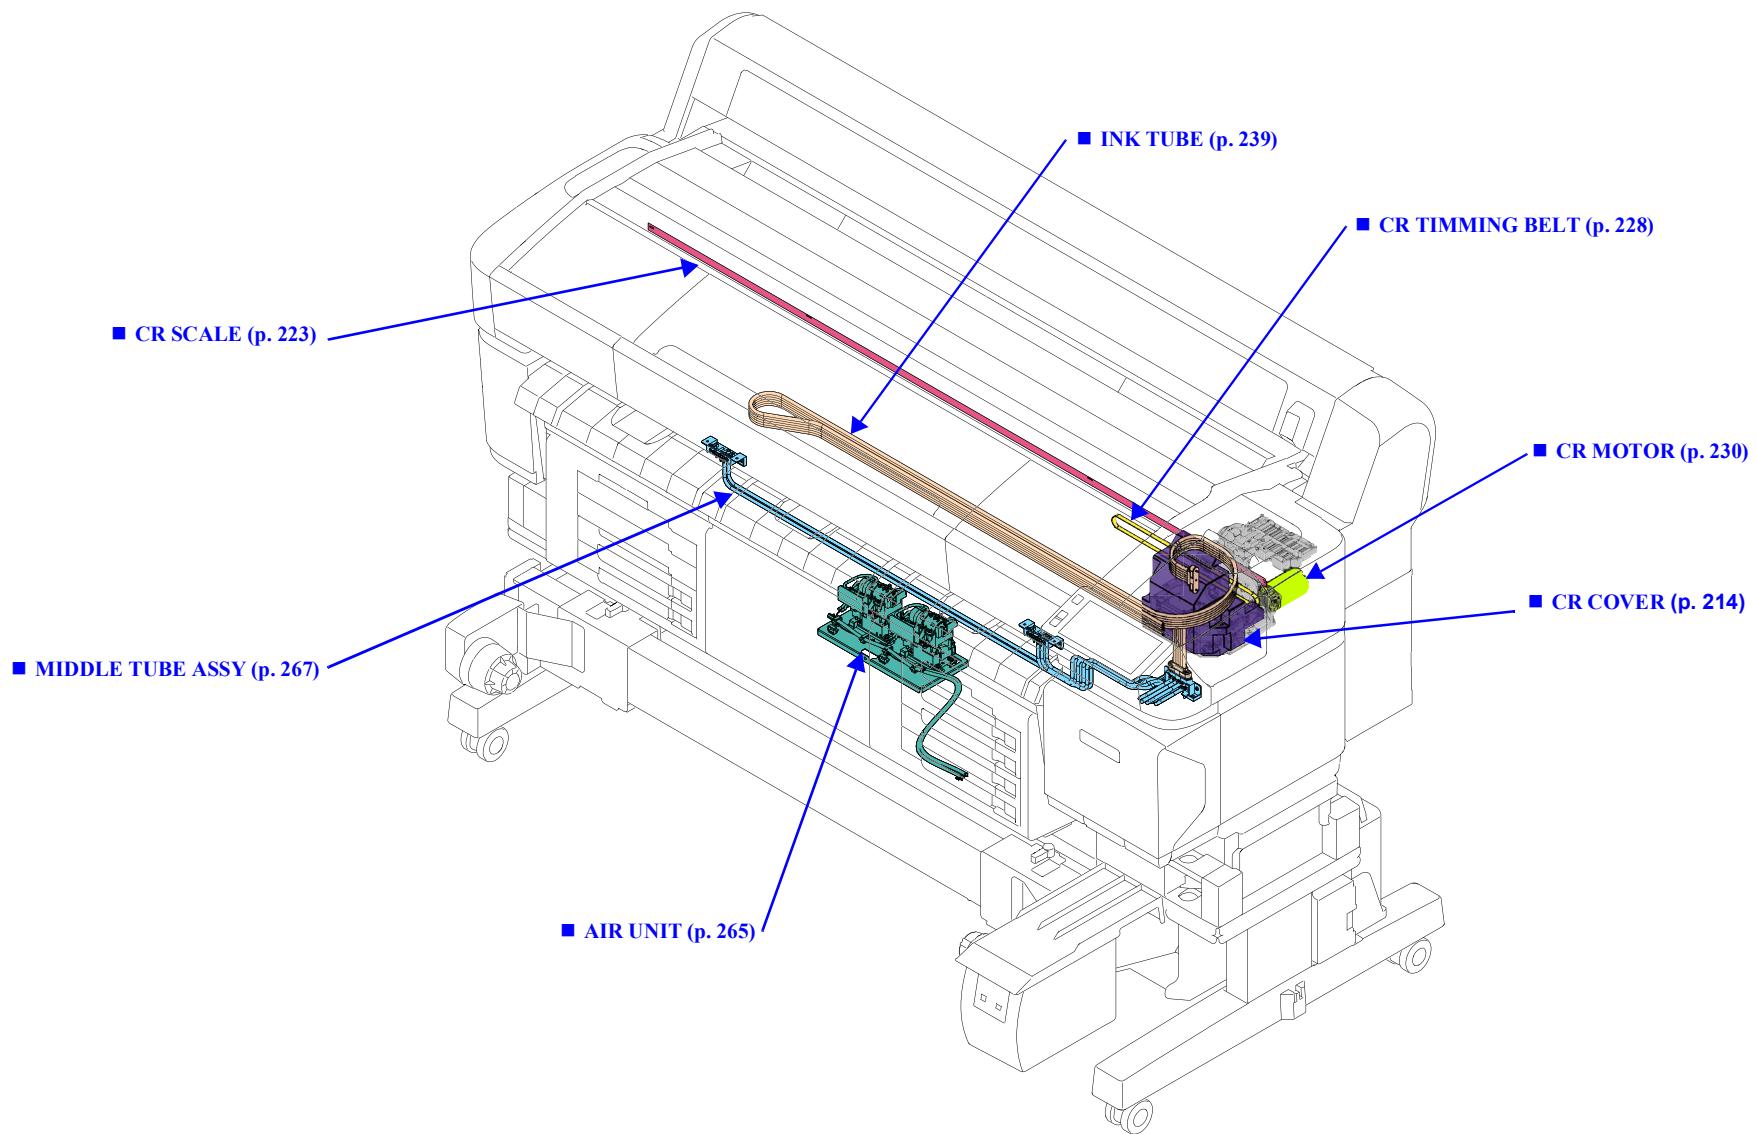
Carriage Mechanism/Ink System Mechanism
